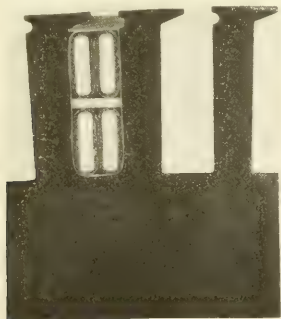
SECTION THROUGH ROTOR COILS AND SLOTS
